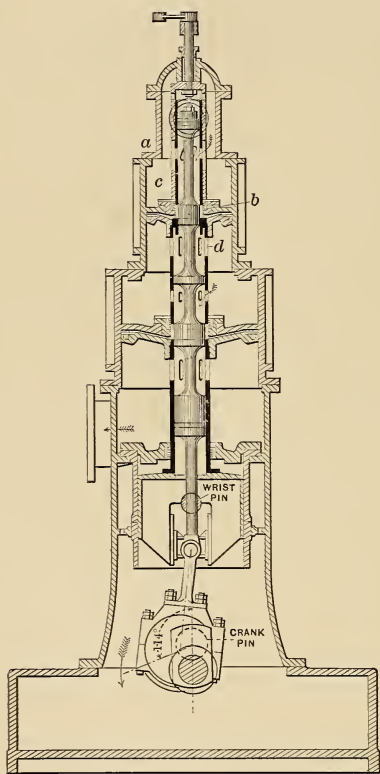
VERTICAL SECTION OF A WILLANS ENGINE
